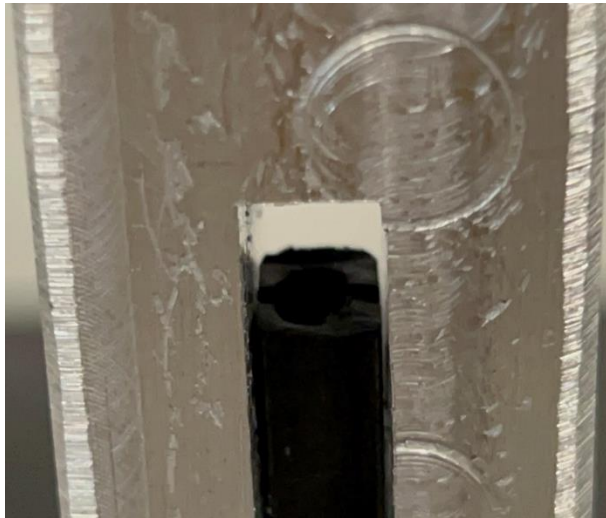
Tensile test of coupler link in the INSTRON machine after failure.
